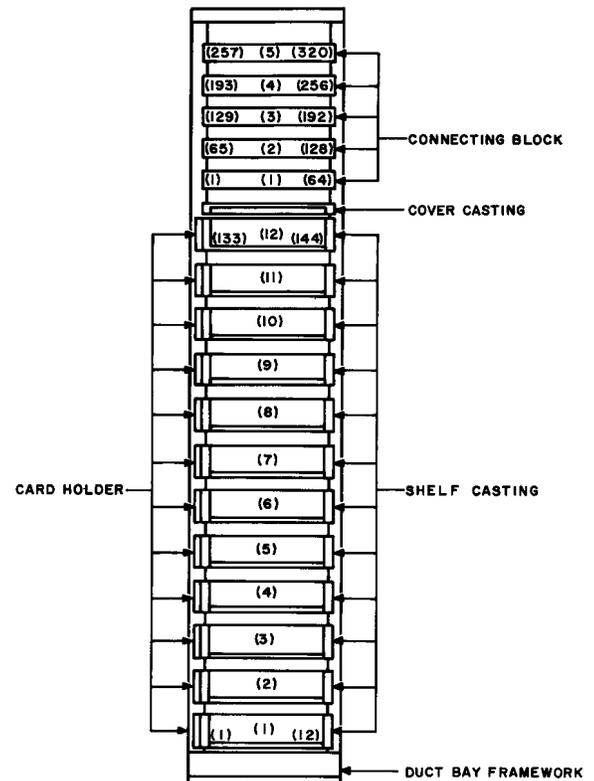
J99323C N2 Line Build-Out Bay Equipped with Line Protectors and Without Line Power Feed (11 Feet 6 Inches High by 26-3/8 Inches Wide)
